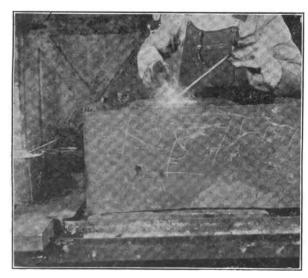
Welding position of the block. Applying the flame and filler.
